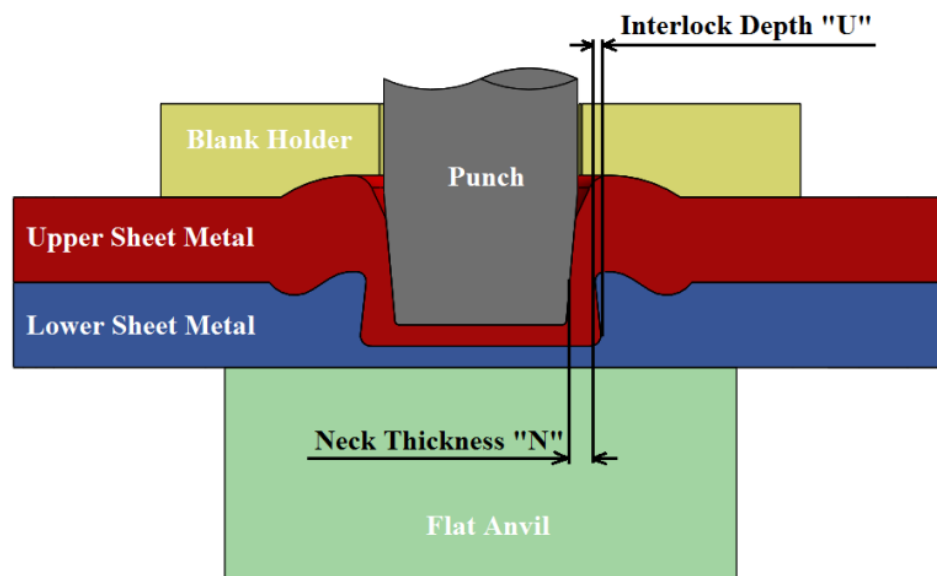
A schematic of cross-section across a single-step die-less clinched joint showing the main geometric parameters of the joint.
